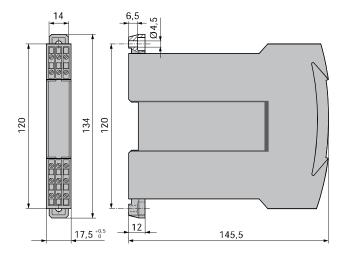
Ziegler 604-II with the screw hole brackets pulled out for wall mounting.
